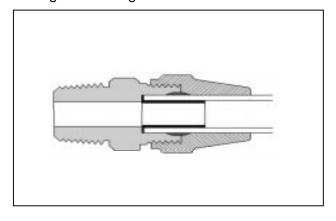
Assembled SAE fitting with tube, sleeve and insert
